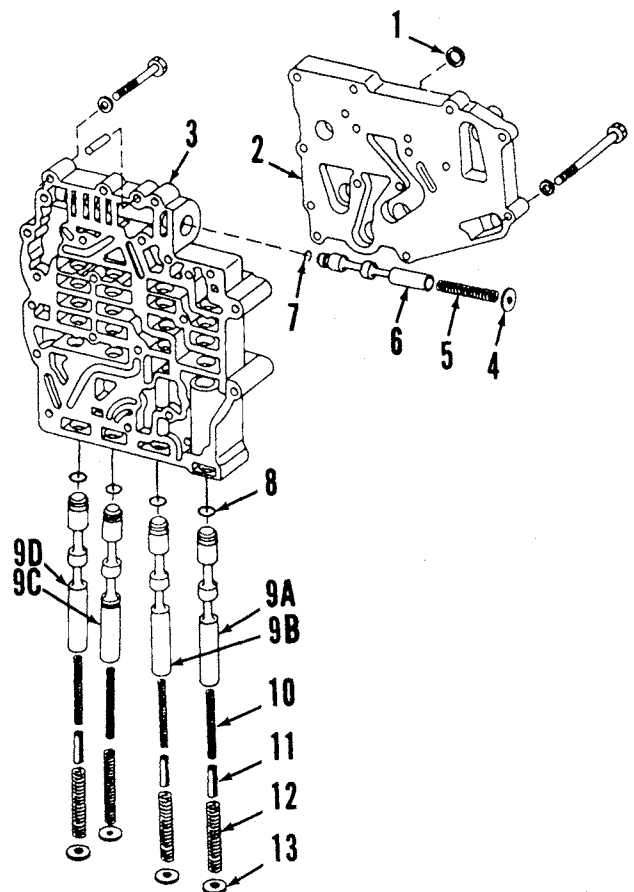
Exploded view of shift control valve used on Power Shift transmission.
